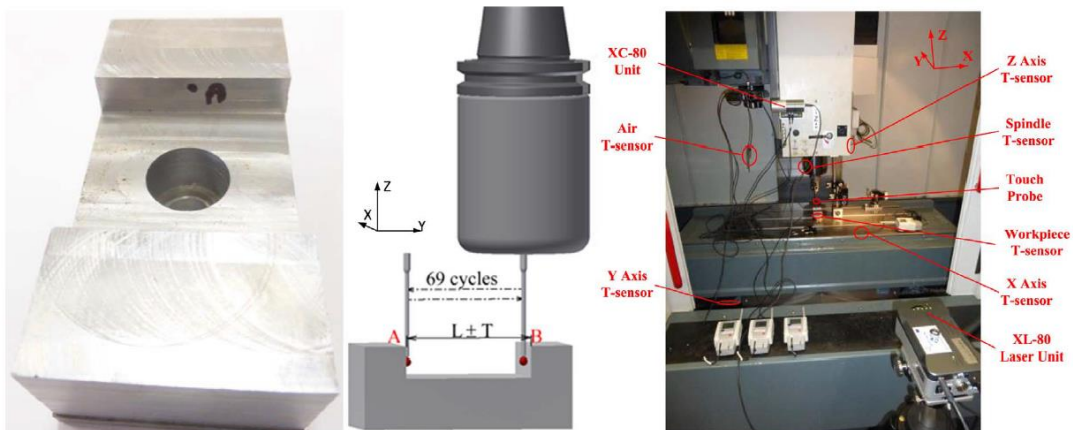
Test workpiece -left, Measurement cycle - middle, Measurement test – right.
